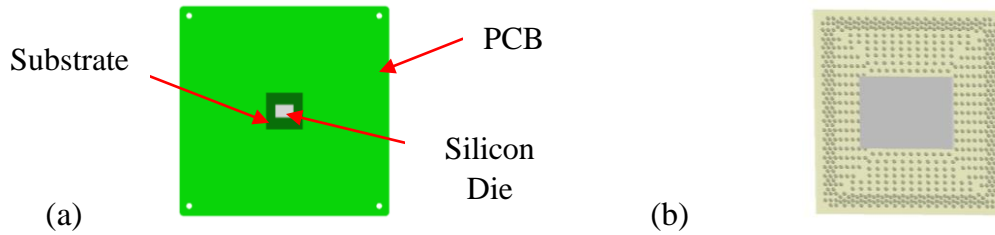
Test Vehicle CAD Model: (a) Board Detail, (b) Solder Ball Detail
